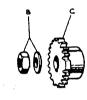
DRIVE SHAFT WITH RIGID TYPE COUPLING.
